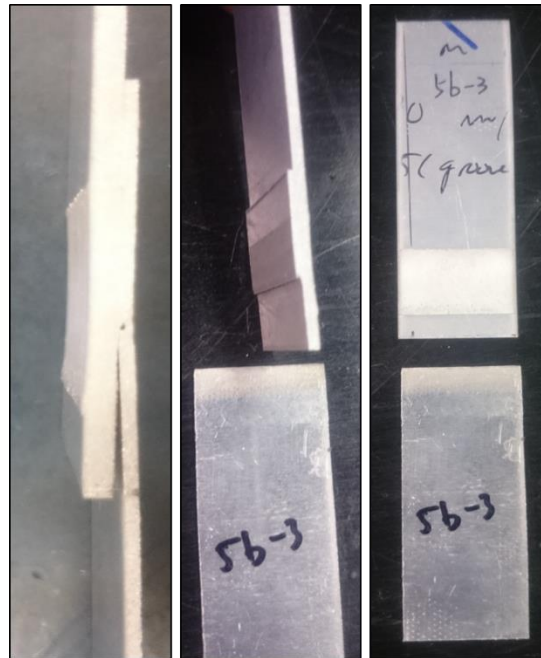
Location of fracture during the lap shear pull tests of dissimilar lap FSW of AA7075-T6 to AA6022-T4 under a welding condition of Tool5-250mm/min
